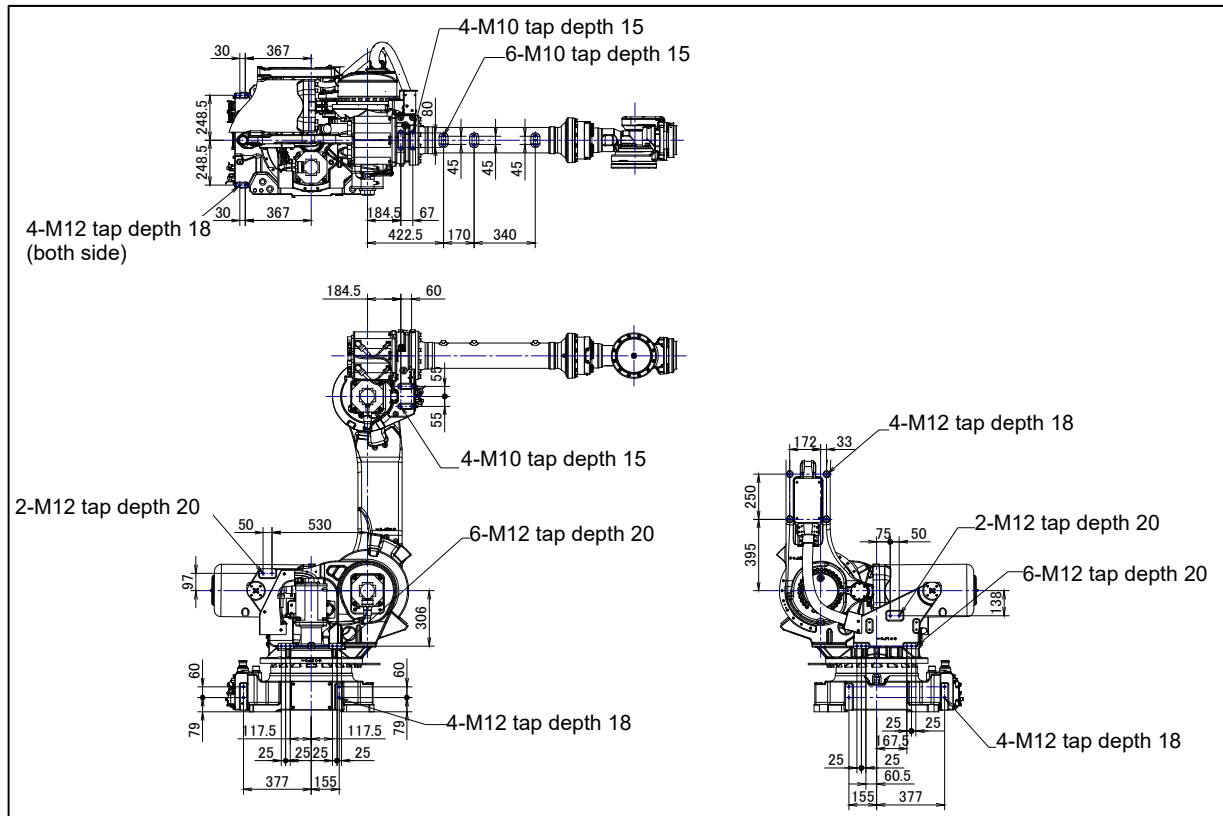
(h) Equipment mounting faces(R-2000iB/175L)
